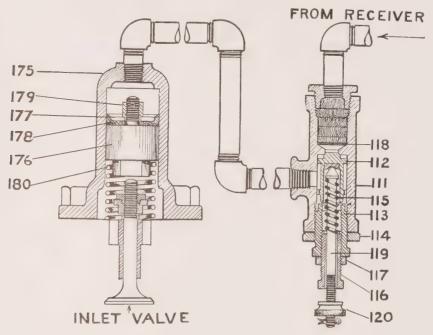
Constant speed unloader and auxiliary valve used with air compressors.
